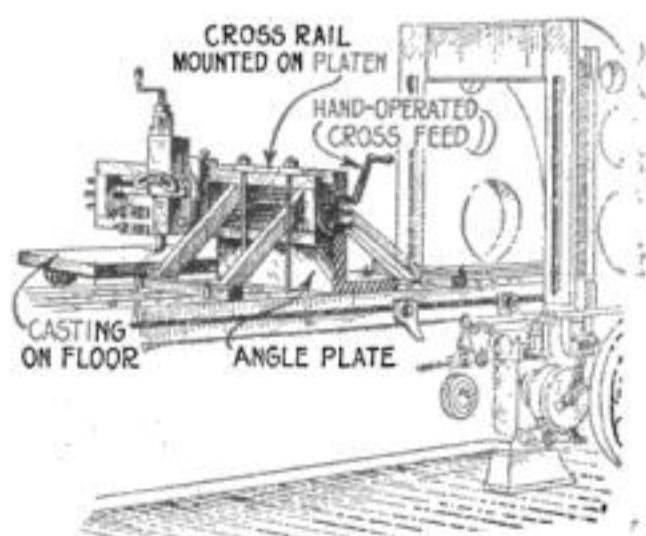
Method of planing a casting too large to be handled on the machine's platen
